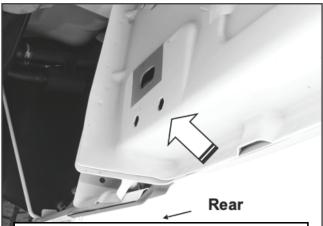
Attach driver/left center/rear Support Bracket to back of pinch weld (models with factory holes in pinch weld only)
